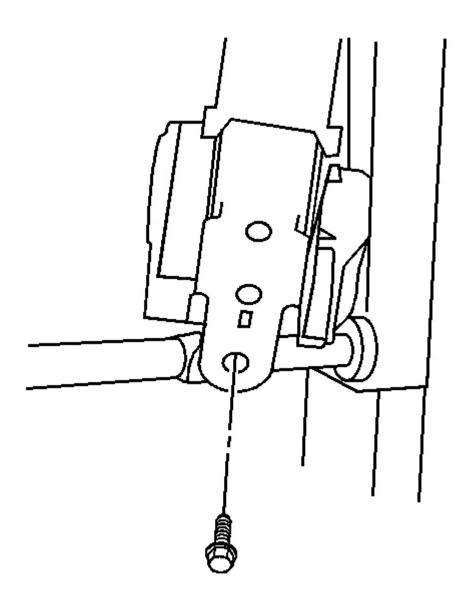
Lower Seat Belt Retractor Bolt - Left Front Courtesy of GENERAL MOTORS CORP.
